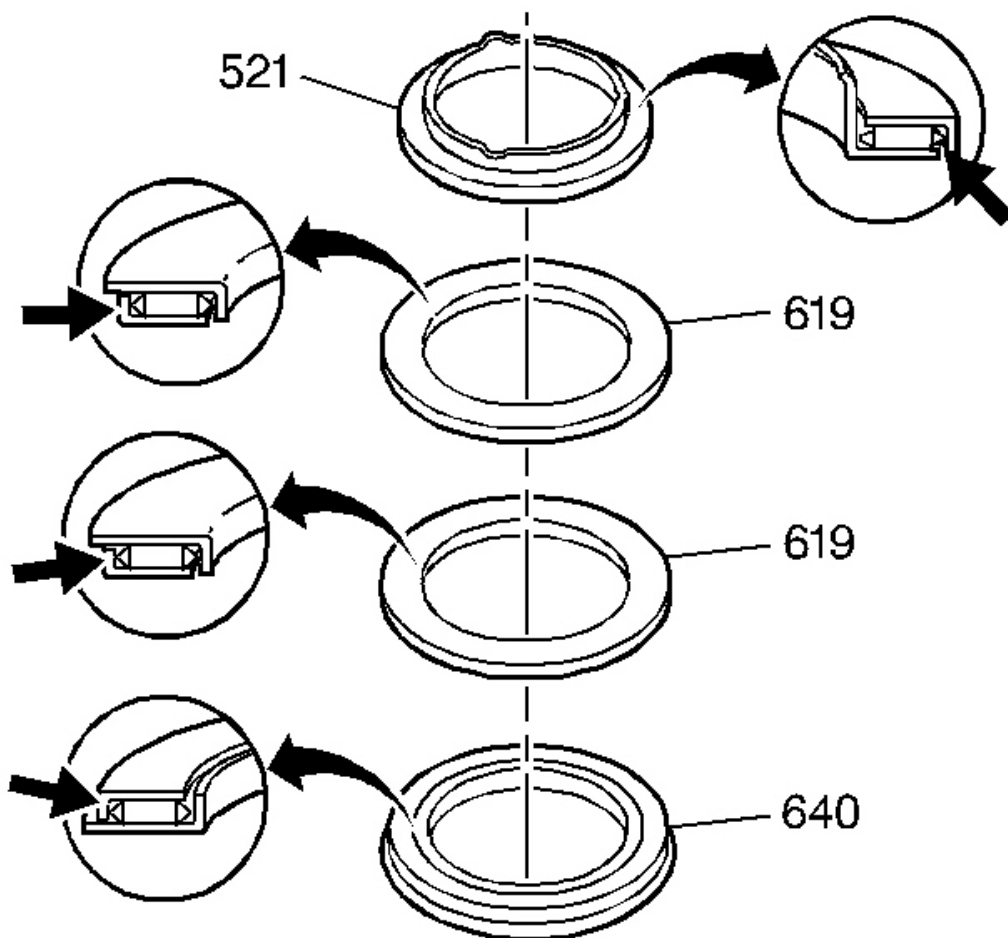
Inspecting Thrust Bearing For Damage Or Wear
